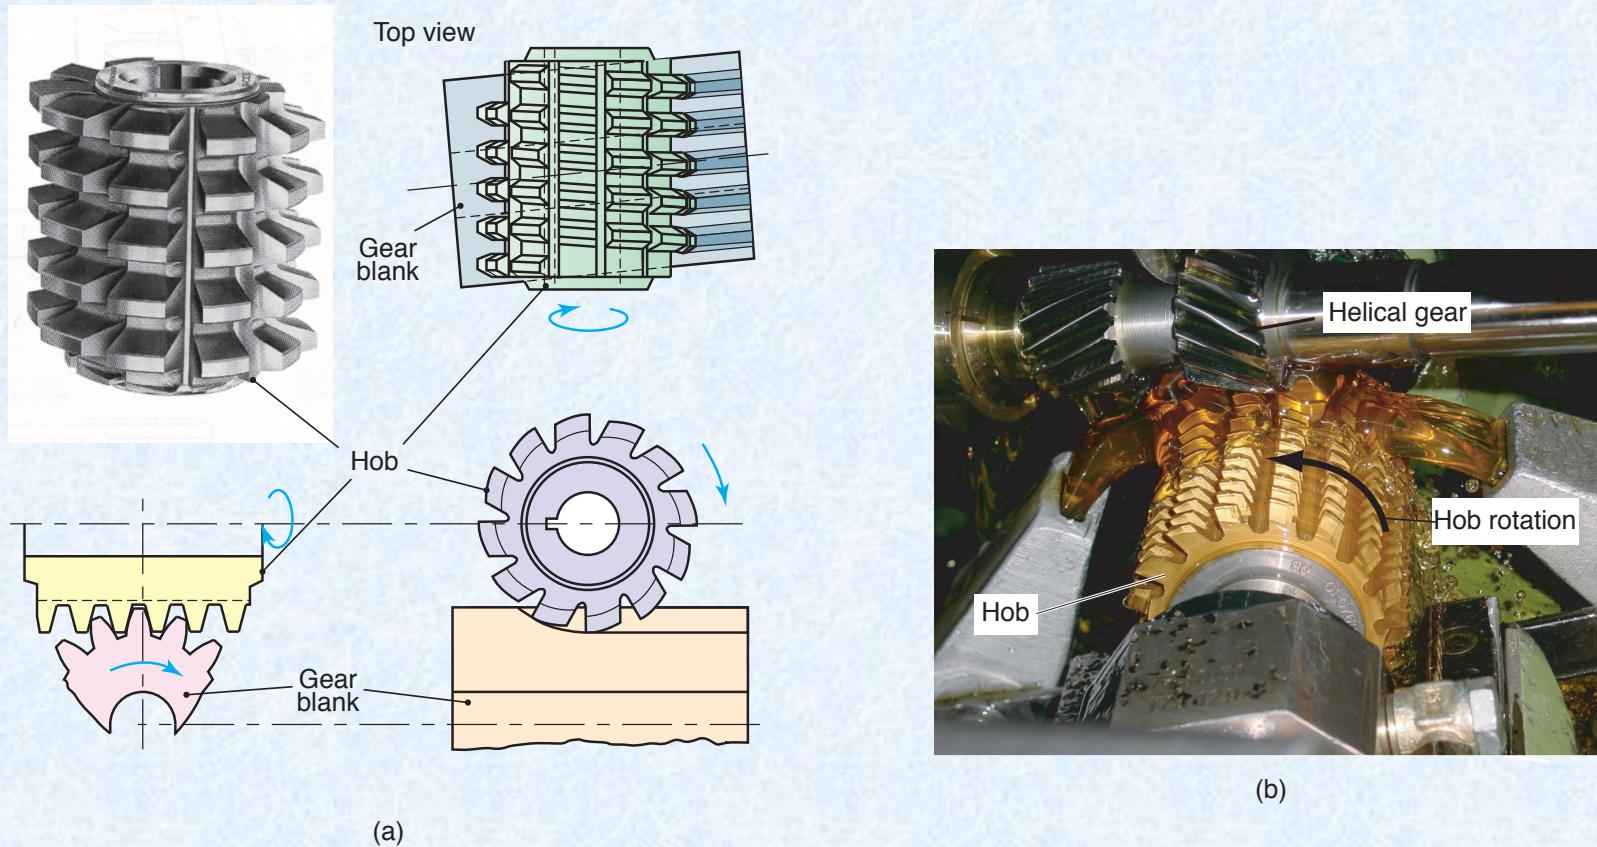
Production of gears through the hobbing process. (a) A hob, along with a schematic illustration of the process. *Source:* From Kalpakjian and Schmid [2010]; (b) production of a worm gear through hobbing. *Source:* Courtesy Schafer Gear Works, Inc.
